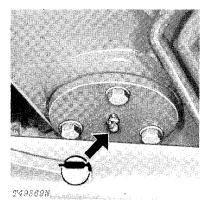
Lower Cluster Gear Shaft Bearing (1 Point)
